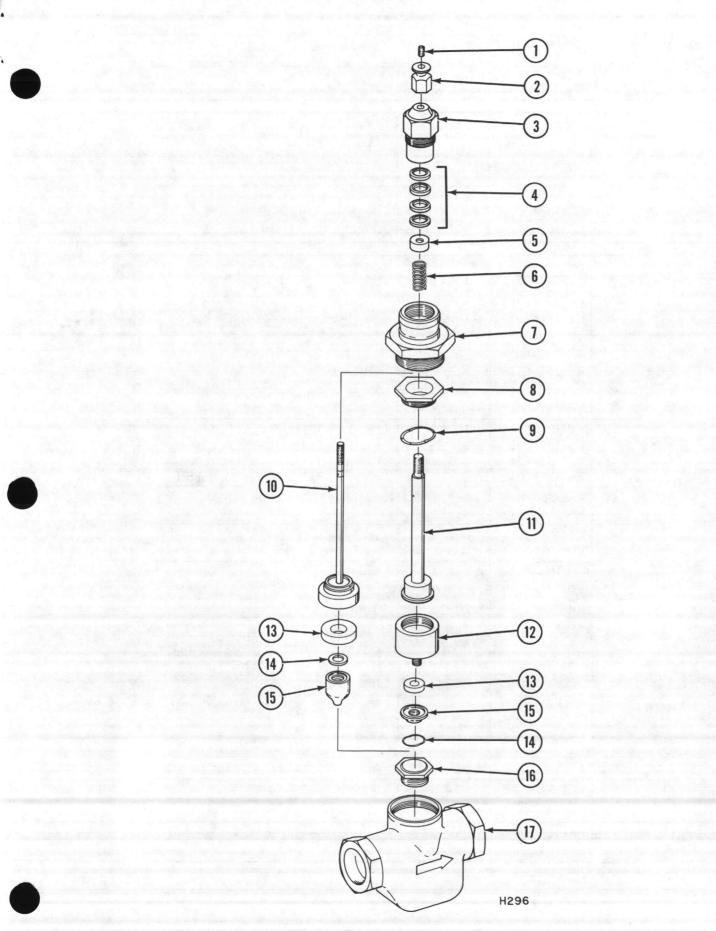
V50llA & C Threaded Body Valves Exploded View.
